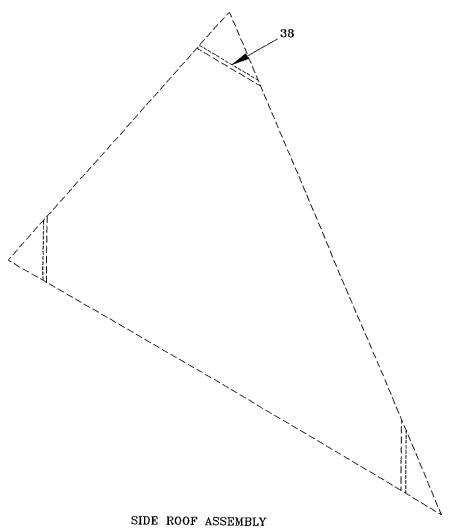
TENT BODY ASSEMBLY (Sheet 4 of 10)
